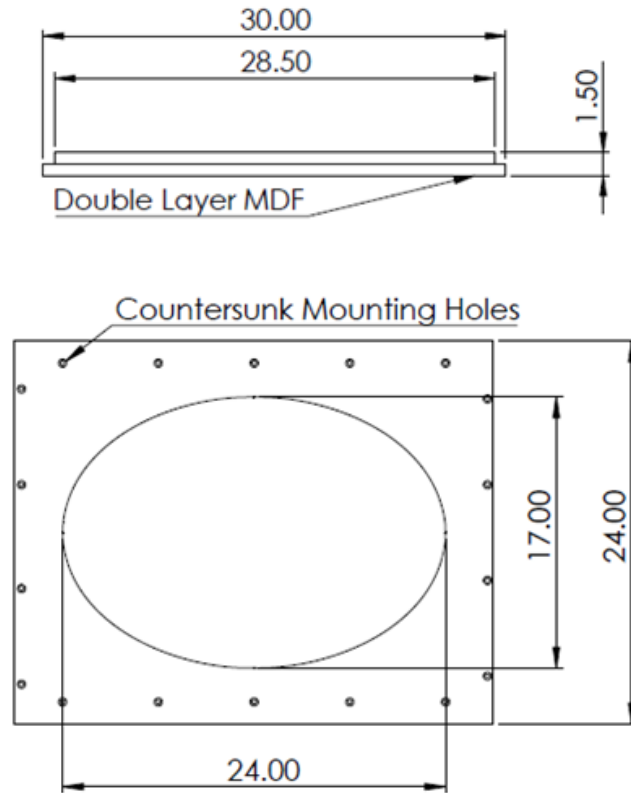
Quiet box specimen door panel assembly construction schematic (all dimensions are shown in inches)
